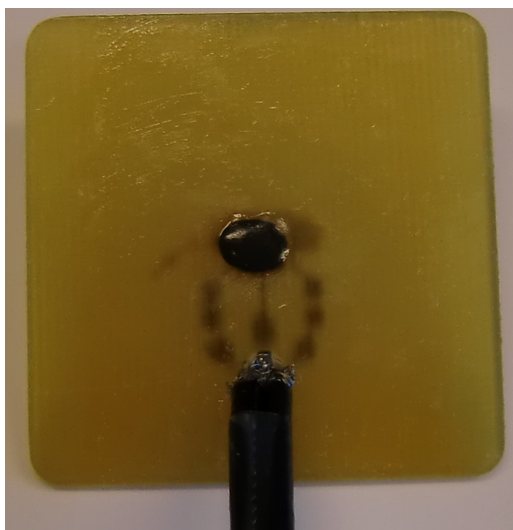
Back side of the PCB showing the center hole filled with the backing layer.
